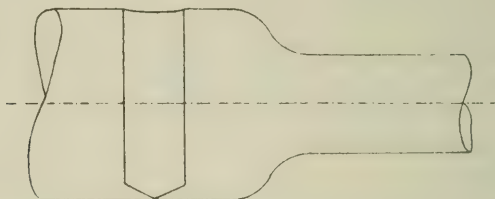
Section of test-bar about shoulder, showing thermometer hole. Actual size.
